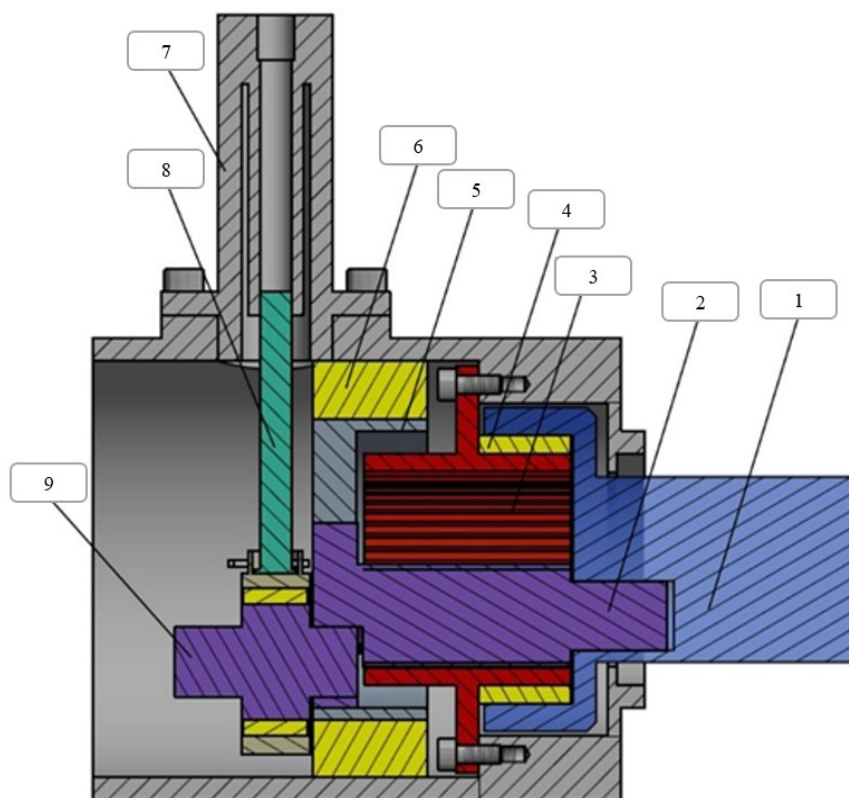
Scheme of high-pressure pump with hypocycloid drive: 1 – main shaft, 2 – countershaft, 3 – toothed wheel with interior toothing, 4 – bearing of main shaft, 5 – support of countershaft, 6 – support bearing, 7 – cylinder of pumping section, 8 – piston (plunger) with guiding element, 9 – mandrel
